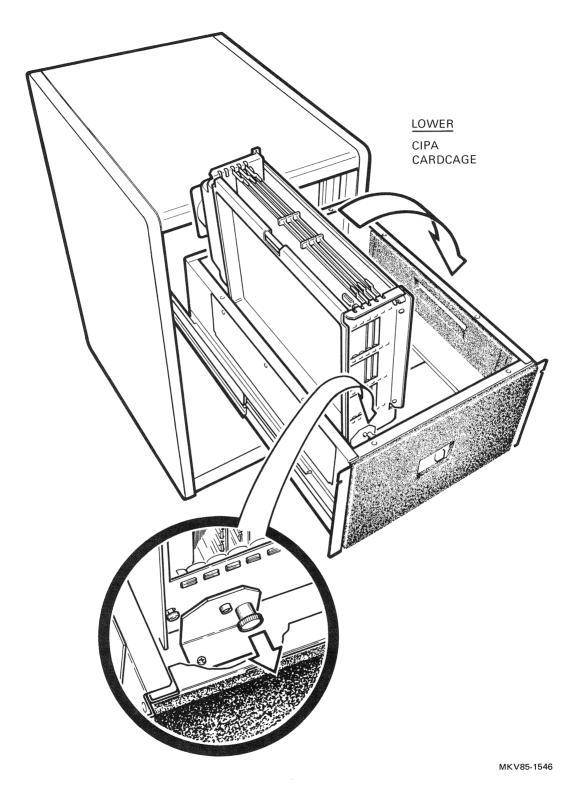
CIPA Mounting Box - Module Access (Sheet 4 of 4)
